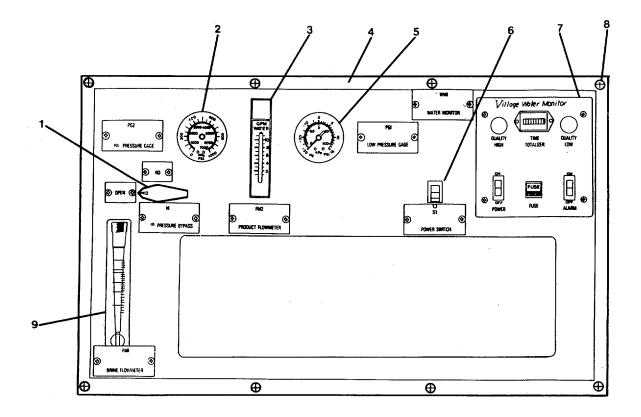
Dash Panel Assembly Repair (Sheet 2 of 2).
